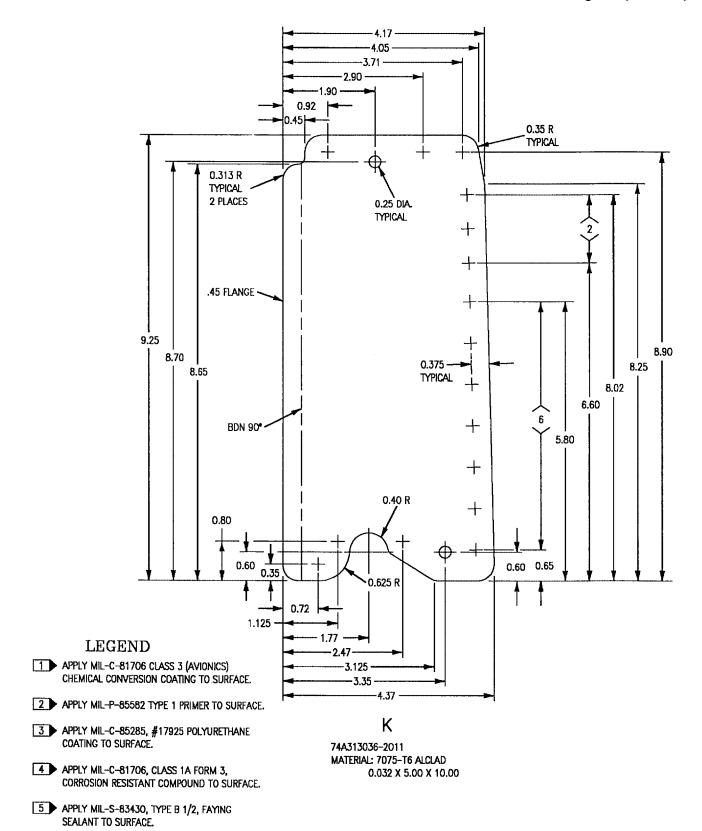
Replacement, Gun Purge Door EMI Seals (Sheet 4)
